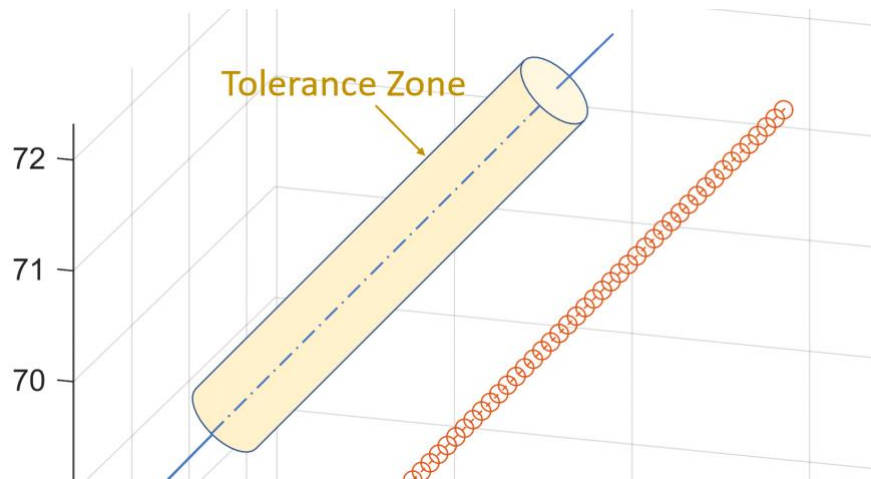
Acceptable Tolerance Zone Around a Machining Toolpath.
